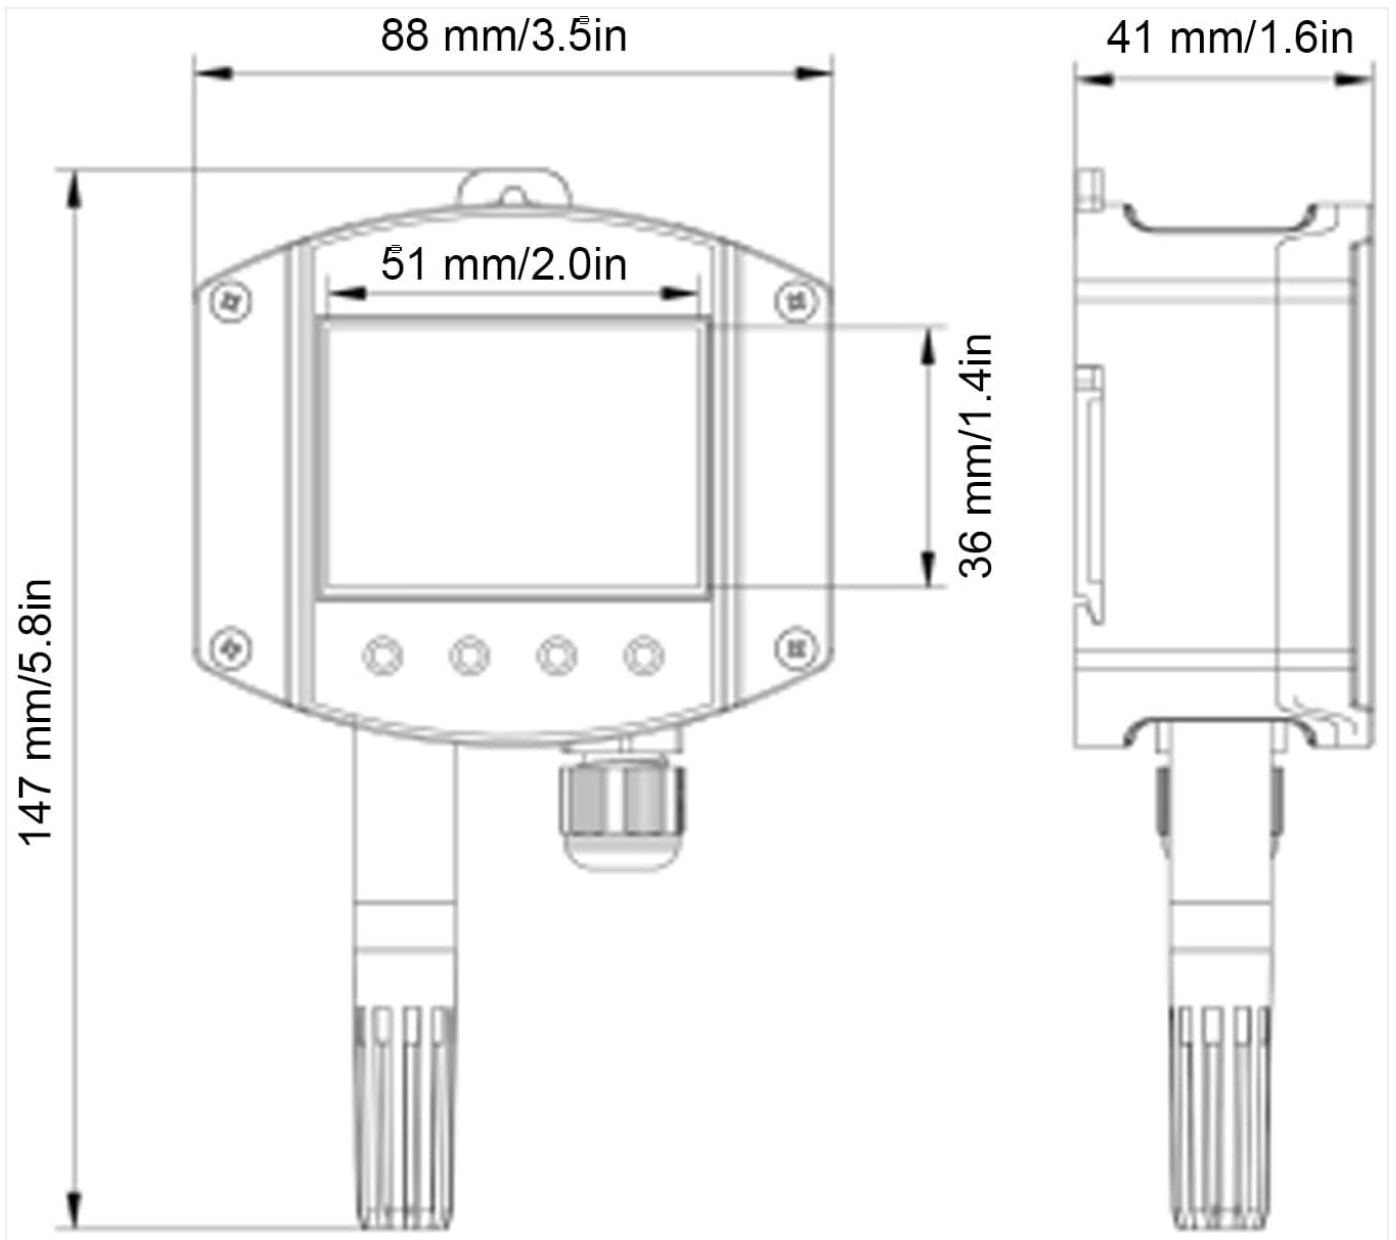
Dimensional drawing of the sensor, showing measurements in millimeters and inches.
